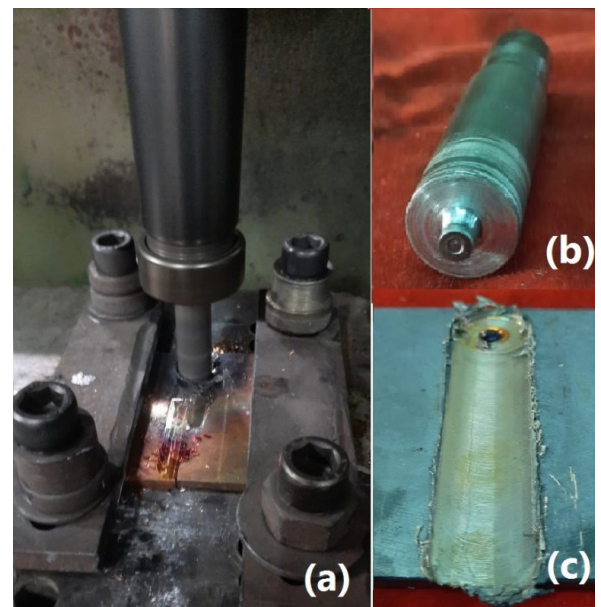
Friction stir welding; a) experimental setup, b) tool, and c) work piece
